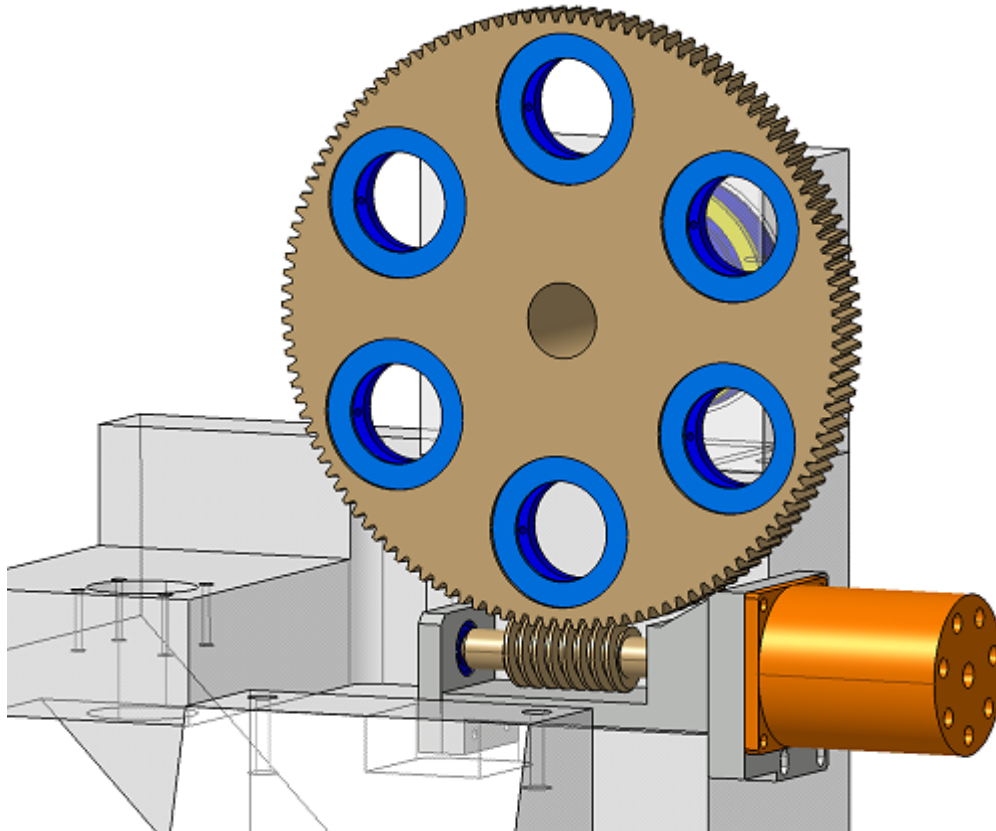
Drawing of the filter wheel system mounted on the main structure
